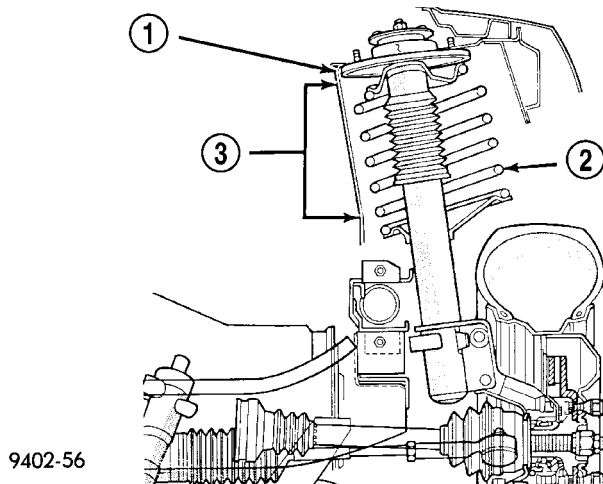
Strut Tower To Coil Spring Minimum Clearance Area (Typical)
